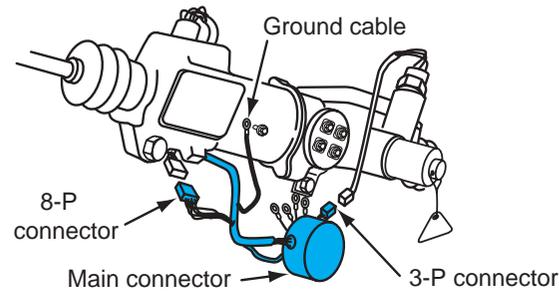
Installing wiring connectors on the rear steering actuator.
